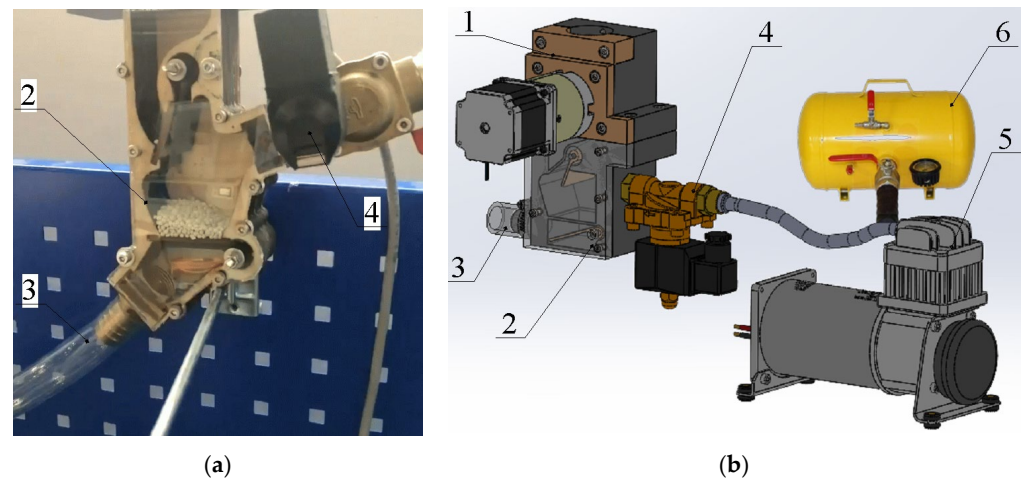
Prototype of the mineral fertilizer applicator: (a) general view; (b) 3D model; 1—metering unit; 2—accumulation chamber; 3—applicator tube; 4—solenoid valve; 5—compressor; 6—air receiver.
